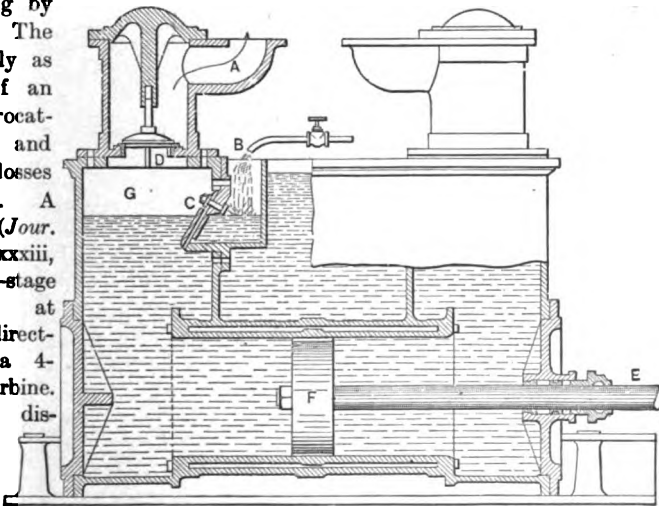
Art. 240. — Sommeiller Hydraulic Piston Compressor.
